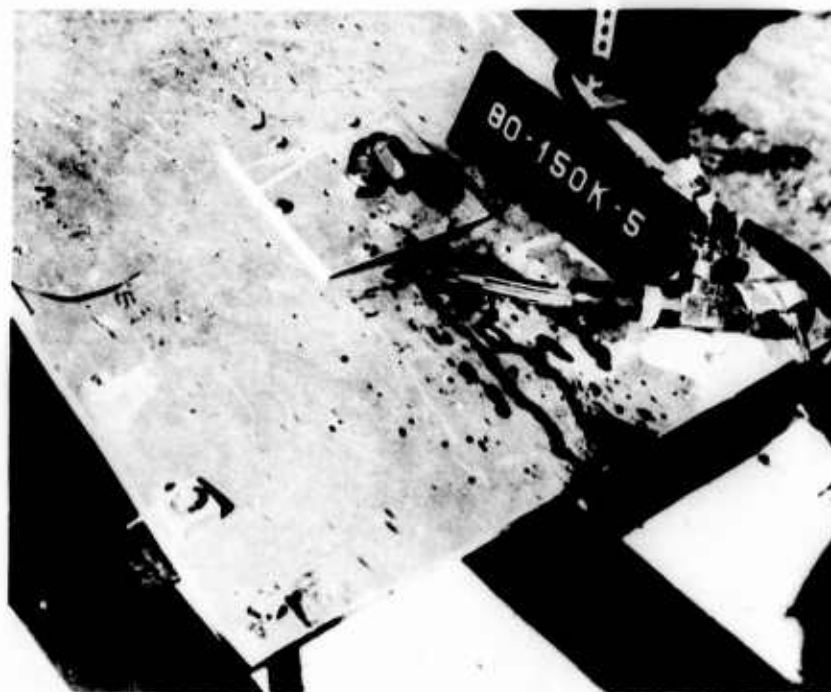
View of Valve A1-1/2 After Dynamic Bending Test.
